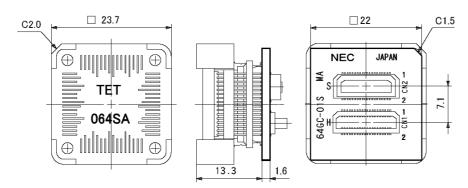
Mount Adapter for V850EA/IK1 (64-Pin GC Package)
